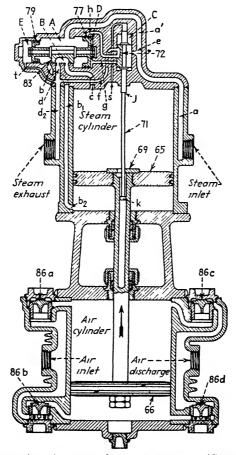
Cross section of a steam-driven compressor. (Courtesy of Westinghouse Air Brake Co.)
